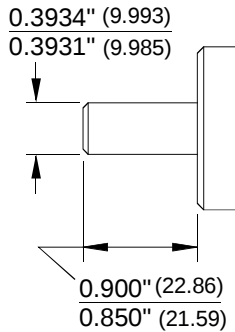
Servo Mount, Side Connect Outline Drawing
